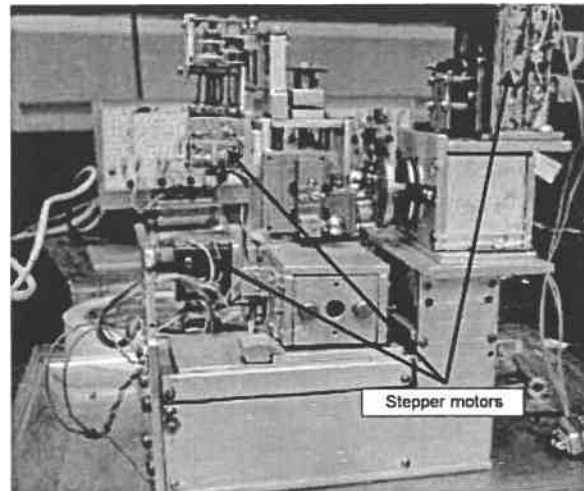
Stepper motors employed in a first-generation micromachine tool.
